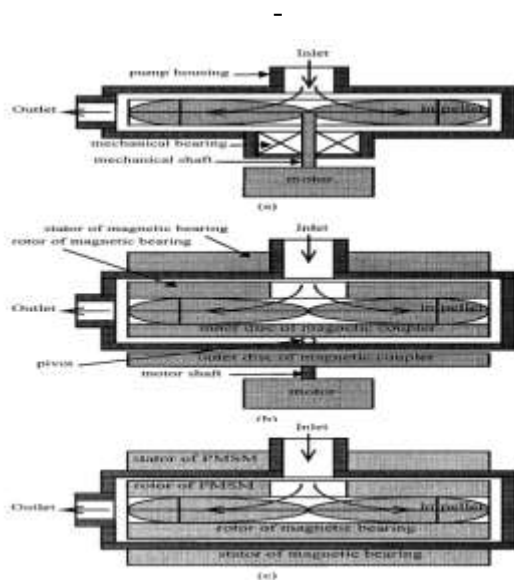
TAH with PMSM. (a) Motor coupled to impeller. (b) Motor coupled to magnetic couplers. (c) Magnetic bearing design.
